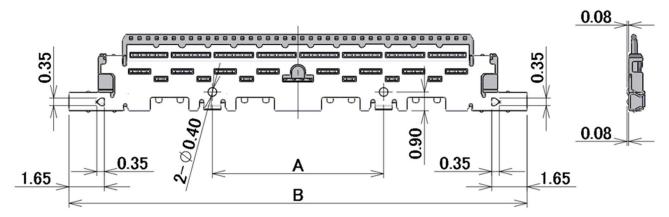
The SHELL bottom side of PLUG HSG ASS'Y
